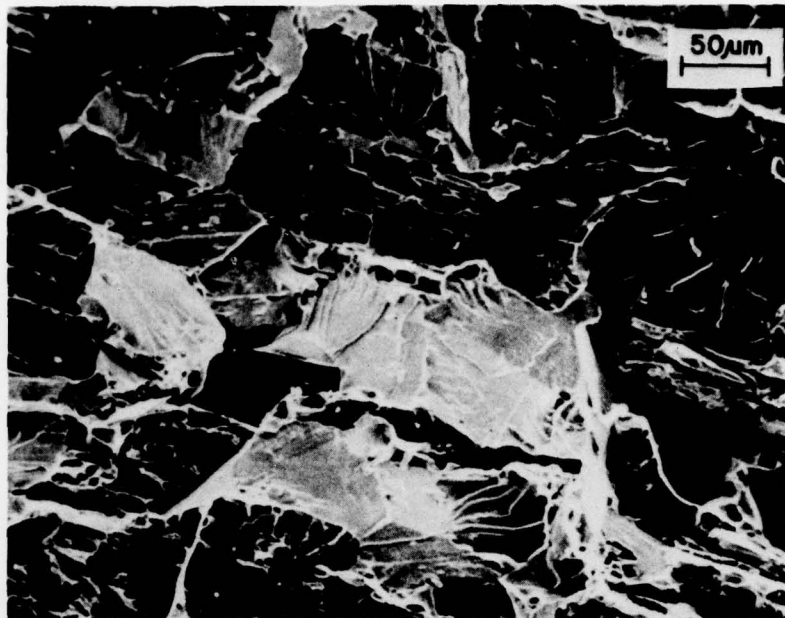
Brittle fracture surface of specimen fractured by impact at 77K (-321F). Specimen 0404C.
